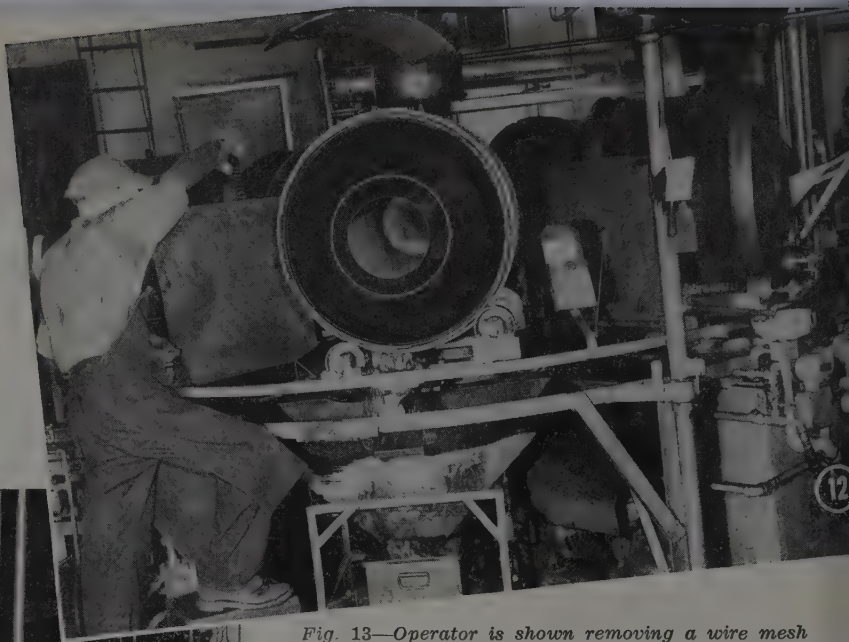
Operator is shown removing a wire mesh basket of fasteners which have been oil quenched after moving through an American Gas Co. continuous shaker type furnace. A reciprocating floor constantly jiggles the parts toward the discharge end of the unit. Heat treatment takes 2½ to 3 minutes at a temperature of 1575 degrees F
